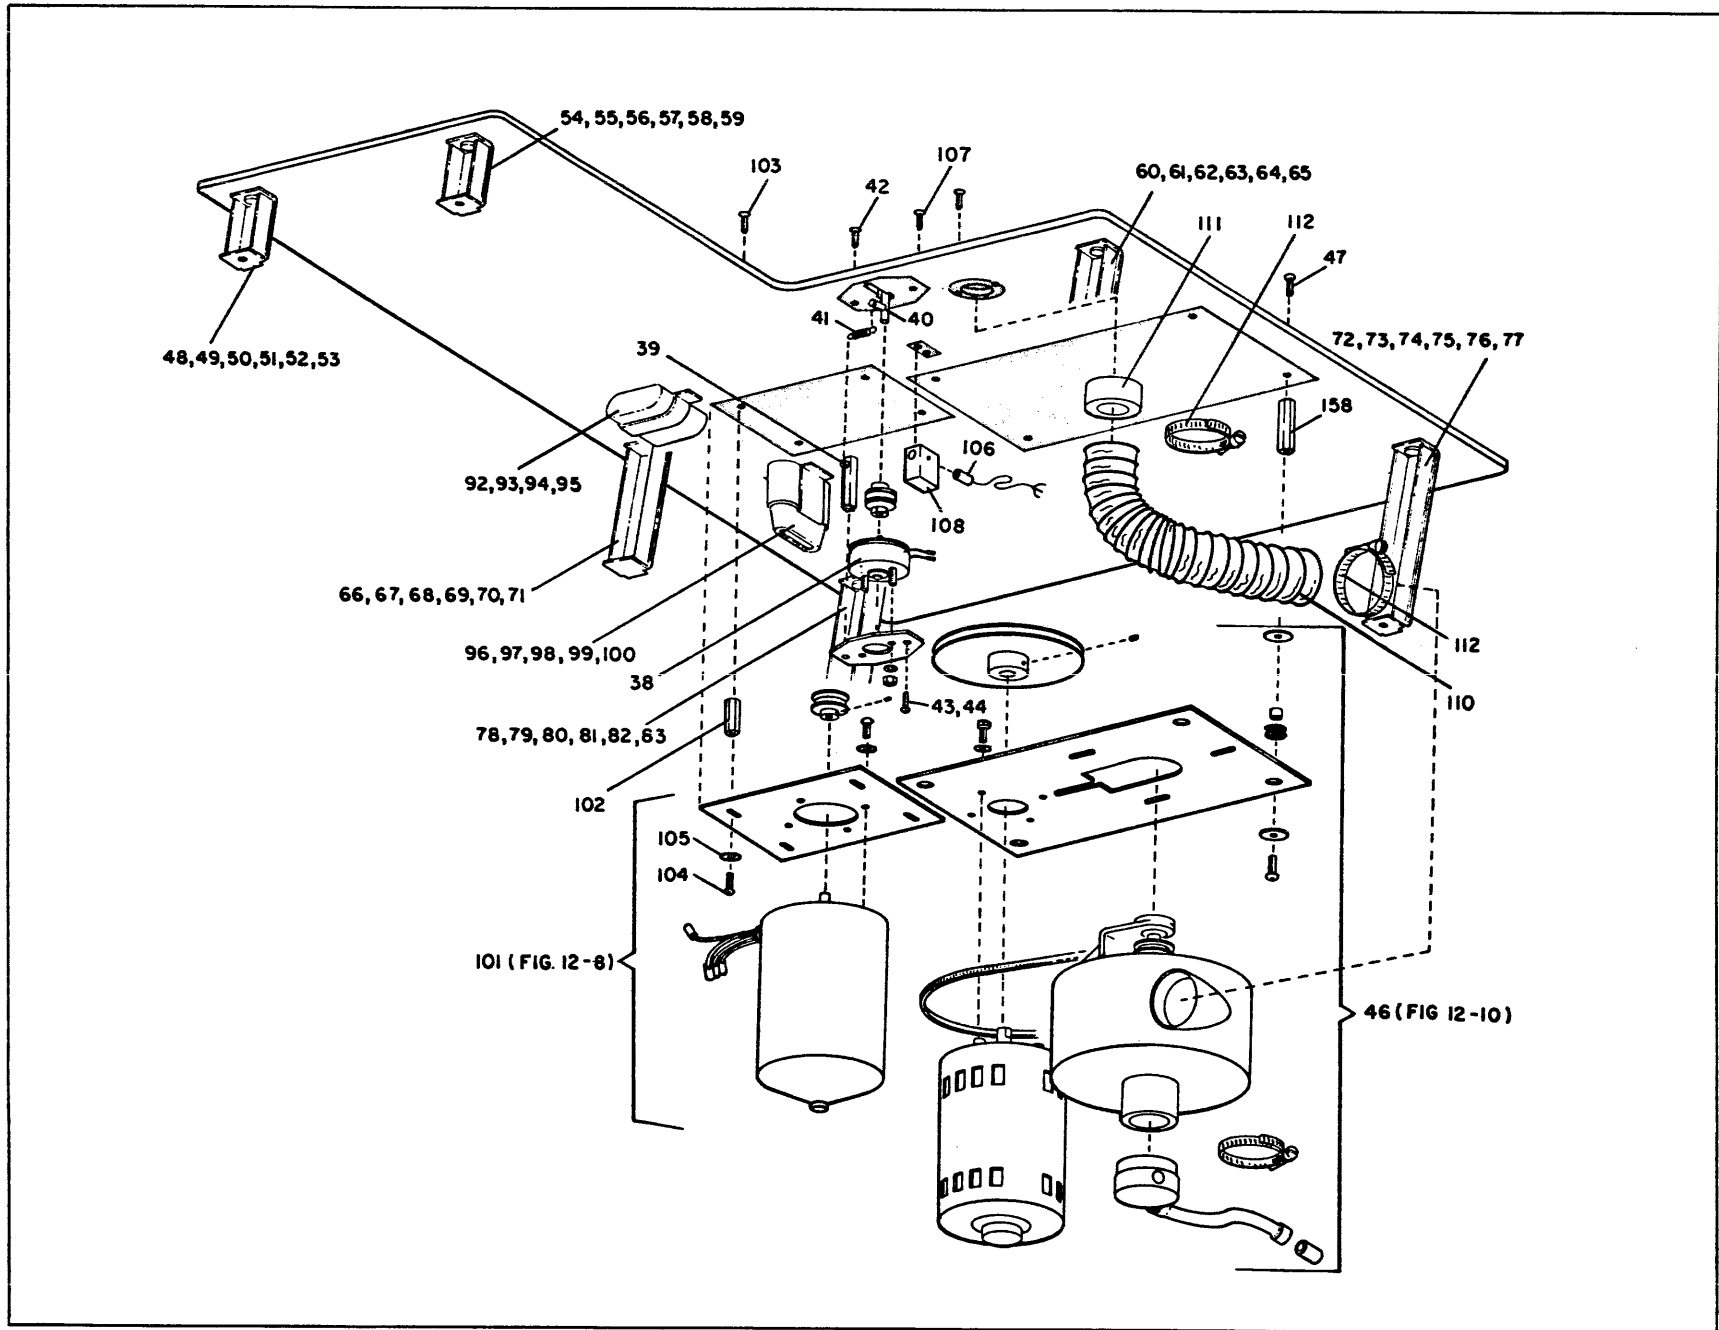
TOP PLATE ASSEMBLY (sheet 3 of 4)
